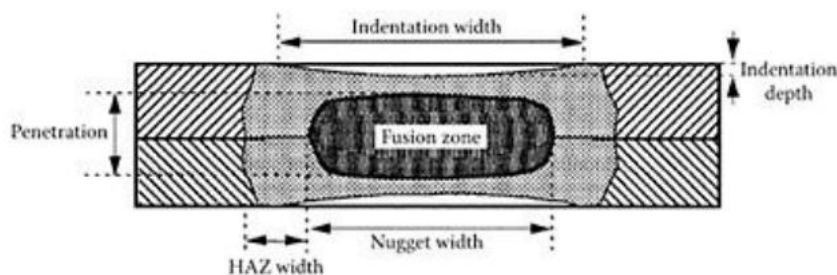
The different dimensions used for quality control of a weld [18].
